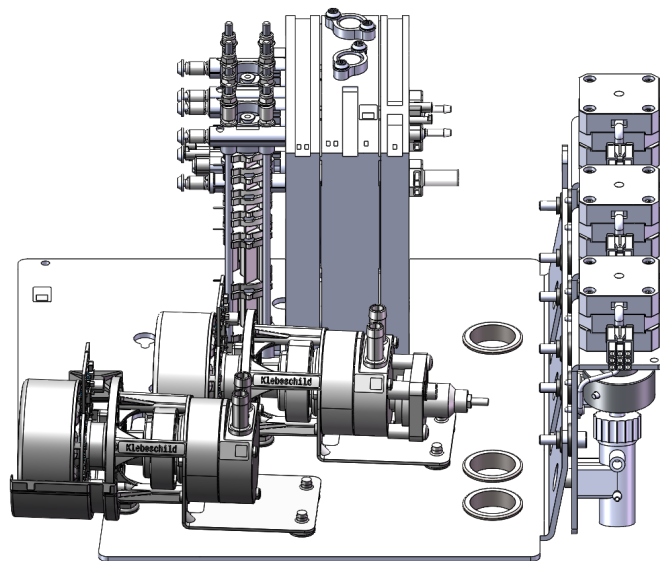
Dialog+ gear pump FPE/FPA mounted
